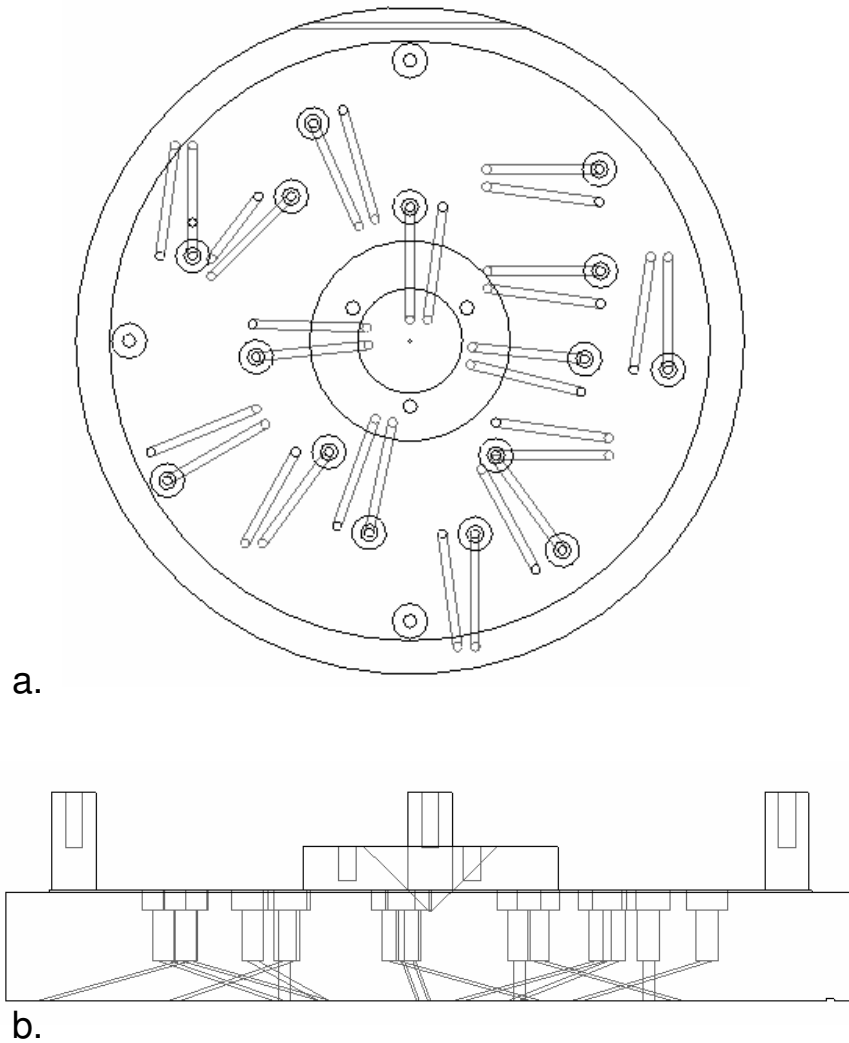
Schematic (a) Top and (b) Cross-Sectional View of RP Fixture
